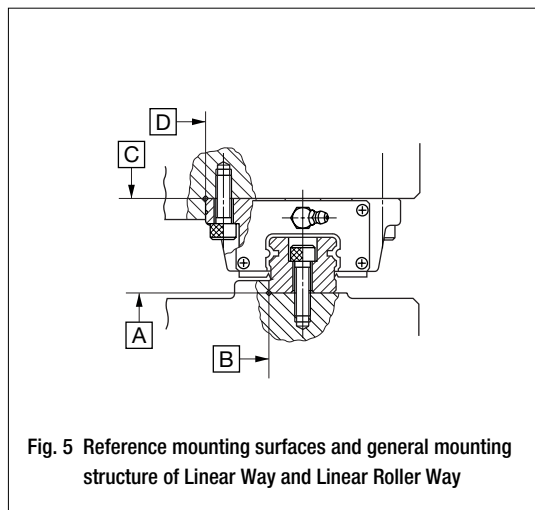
Reference mounting surfaces and general mounting structure of Linear Way and Linear Roller Way
